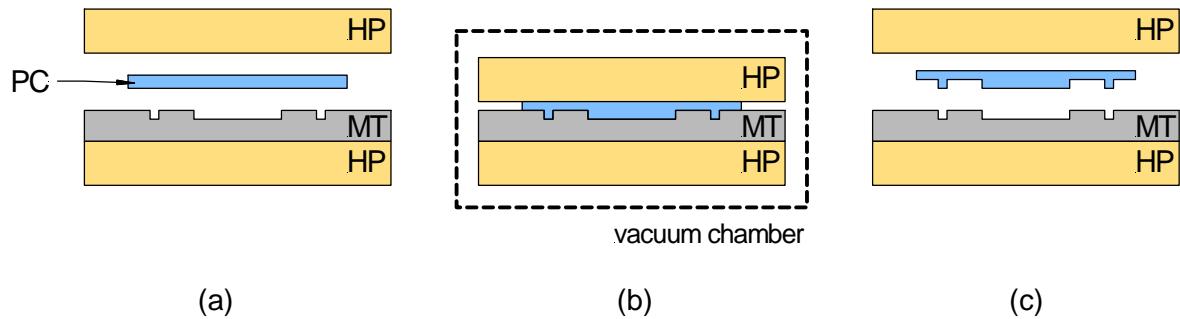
Schematic of the hot embossing process (HP: Hot plates, MT: Molding tool, PC: PC sheet). (a) Loading a PC sheet into the machine and preheating (b) Applying the embossing force to press the softened PC into the molding tool under vacuum (c) Cooling down to deforming temperature and deforming of the hot embossed PC component.
